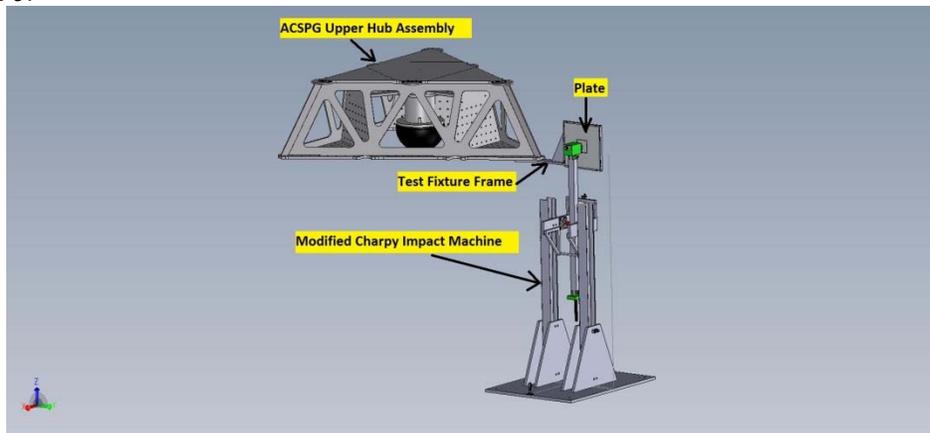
The ACSPG upper hub assembly with test fixture frame and plate attached and the Modified Charpy Impact Machine (at the moment of impact with the plate).
